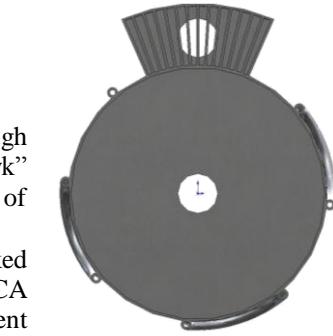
MTSAs EDU Cross-section, front end cap and inlets removed, view at back wall of subassembly
